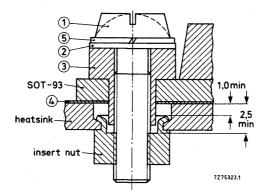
Assembly and heatsink requirements for 500 V insulation. See also Fig. 3.
